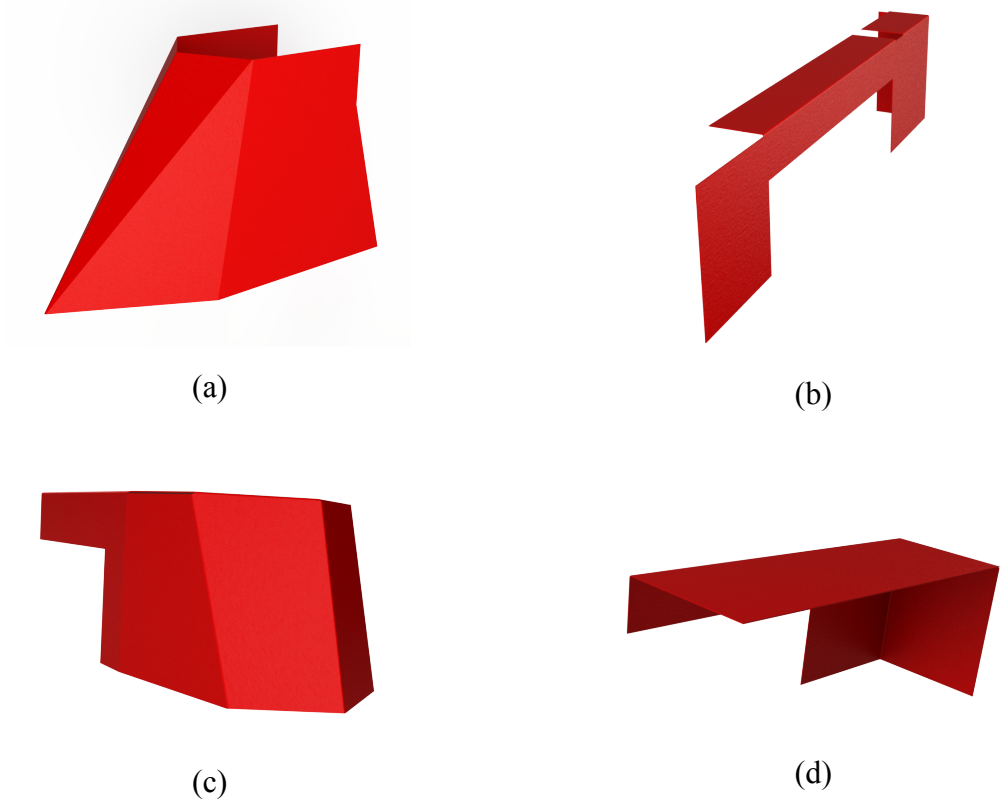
Cover parts (a) Wheel module cover, (b) Inside cover, (c) Front cover, and (d) Back cover
